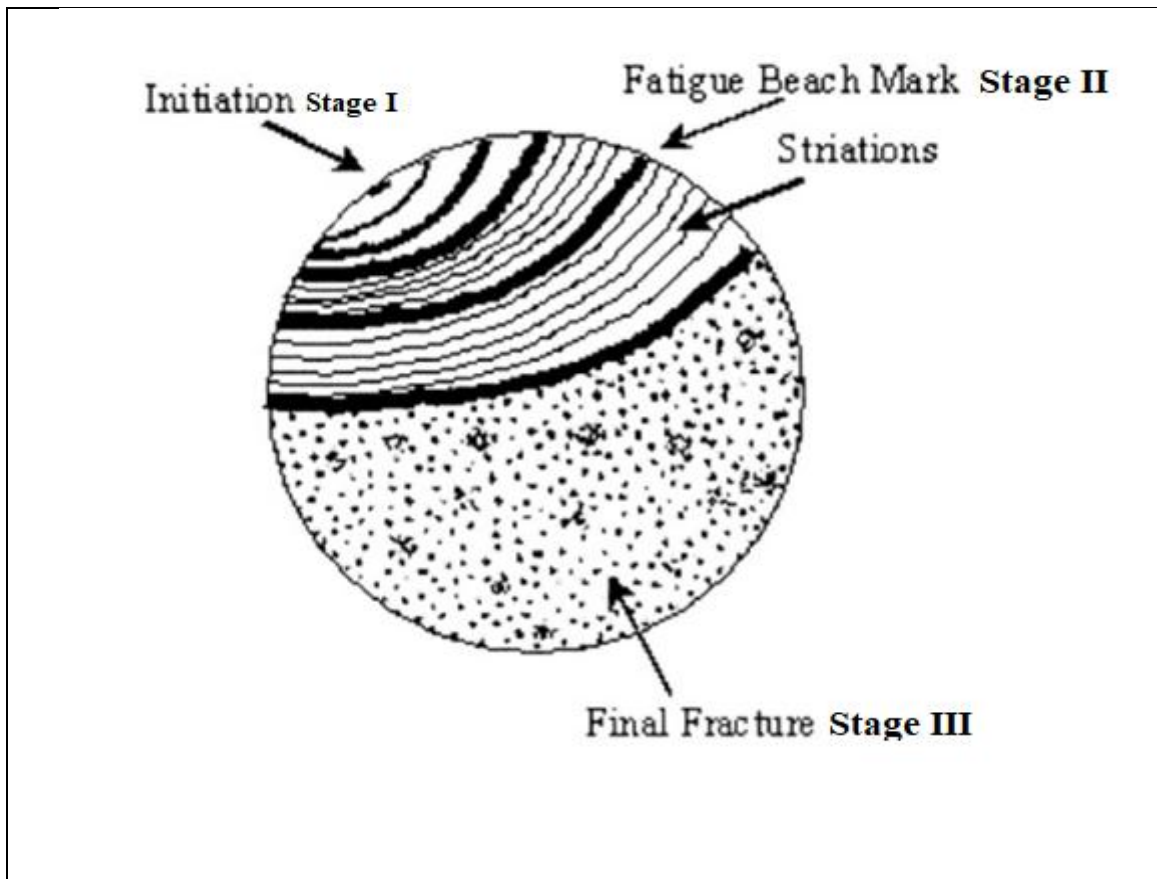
Fatigue Fracture Surface [6]
